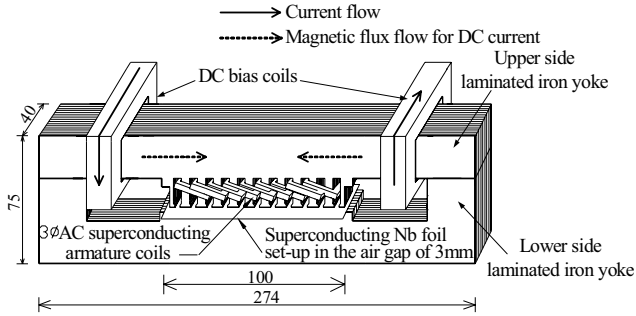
Structure of fabricated linear-type magnetic flux pump [5,6].
